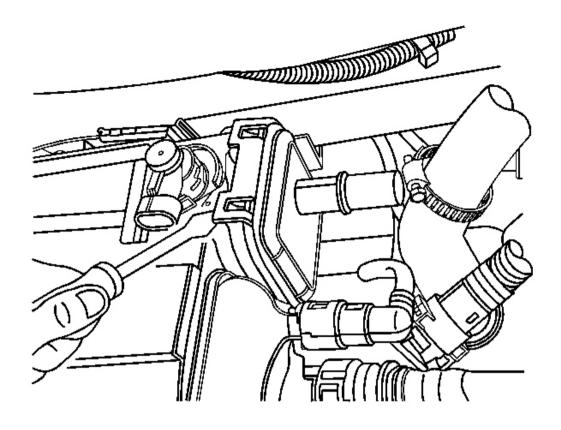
View Of Evaporative Emission Canister Vent Filter Cover Courtesy of GENERAL MOTORS CORP.
